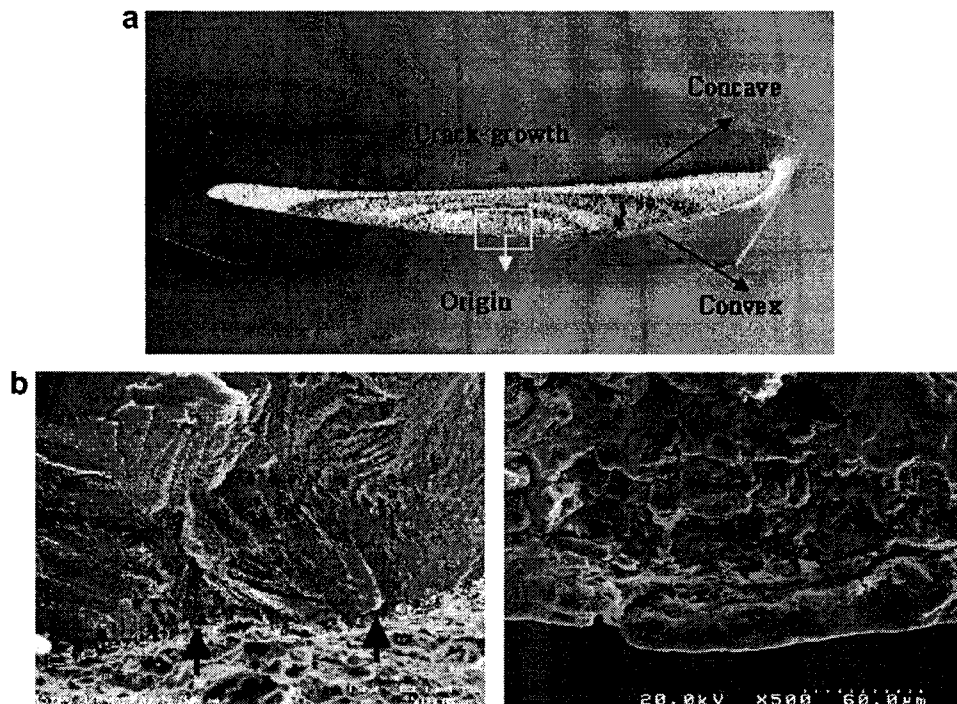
(a) Photograph of fracture fan blade and (b) SEM of corroded multi-origins of fatigue crack.
